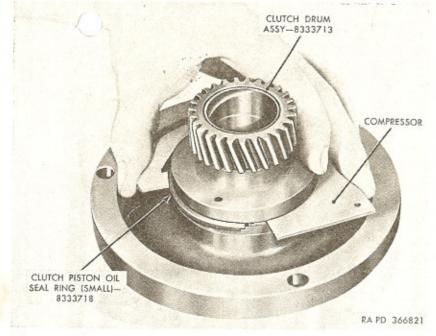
Installing small oil seal ring on clutch drum using compressor— C8708711.
